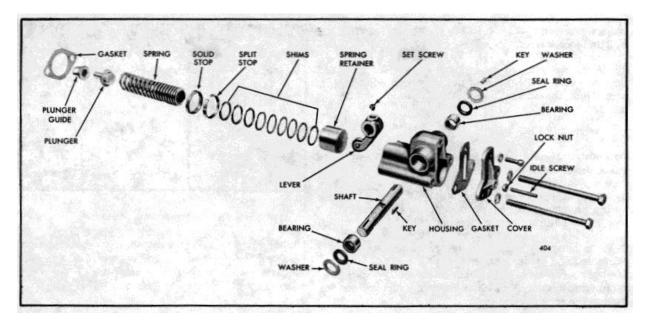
Variable Speed Spring Housing and Shaft Details and Relative Location of Parts
